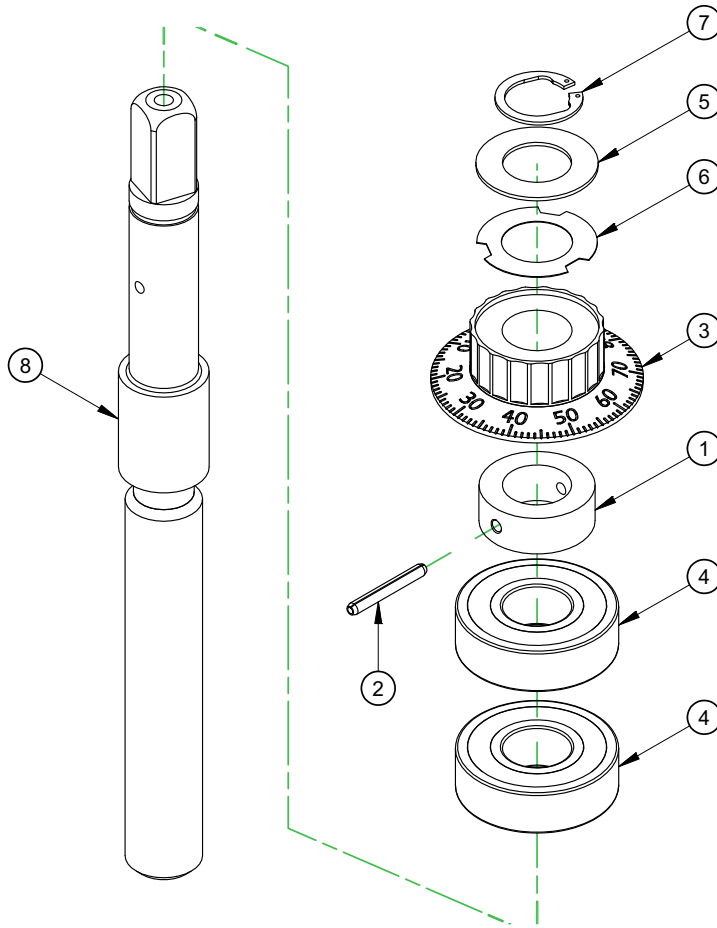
GEARBOX SPINDLE DRIVETOP ASSEMBLY (P/N 34403)
